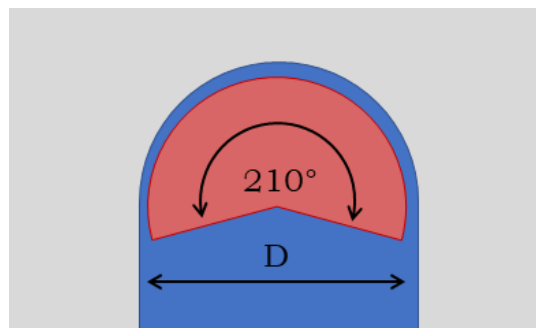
The sketch displays a top view of the drill head (red) in a drilled hole (blue) through the bone phantom (grey). The drill head is based on a cylinder of 6mm diameter and 5mm height. A 210° section of the cylinder face is used for cutting, making that the remaining 150° section can be removed from the design.
